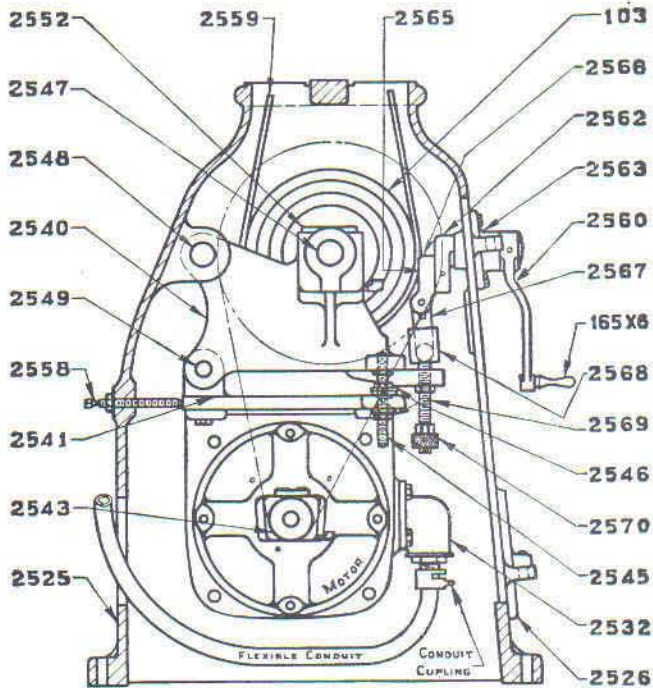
End View Drawing Showing Position of Parts of Underneath Belt Motor Drive Unit in Assembly.
